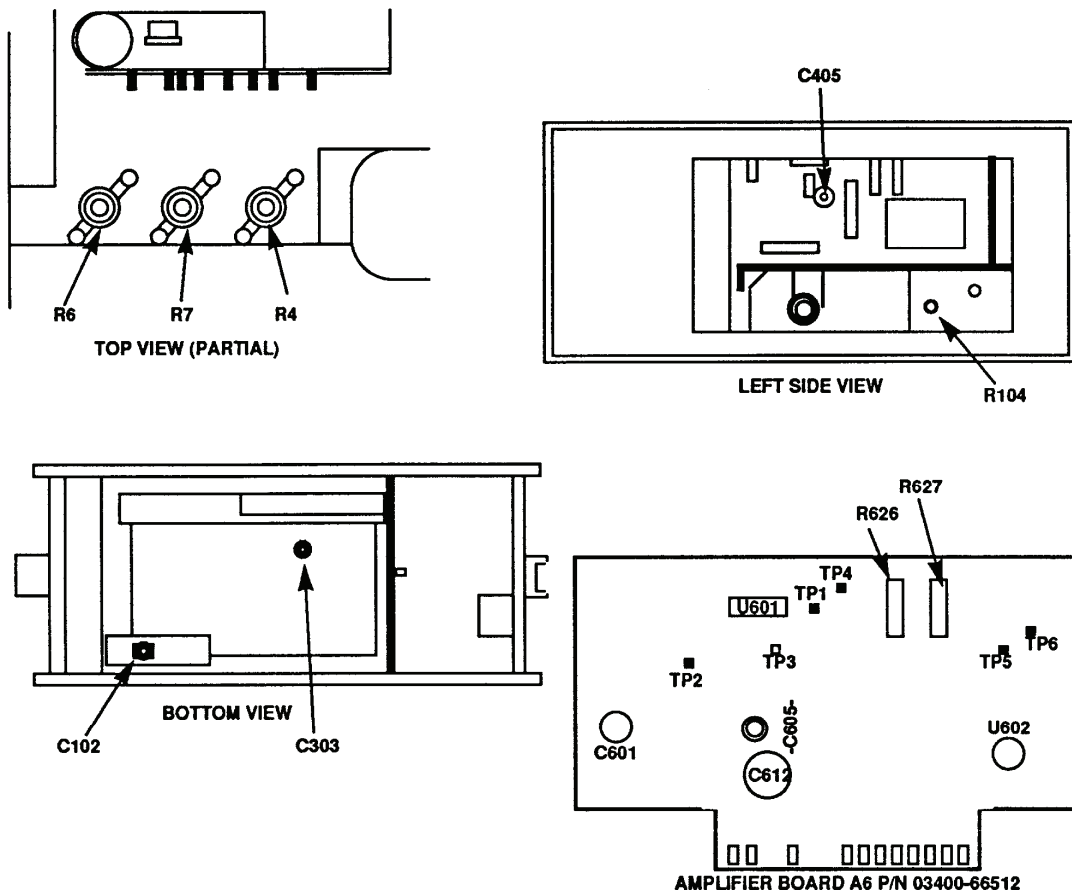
Test instrument - top, left side, bottom view, and A6 board, P/N 03400-66512.
